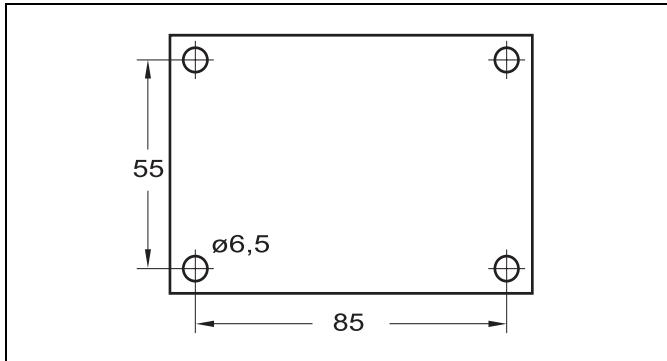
Hole pattern for the stand for the U 4856 circulating pump
